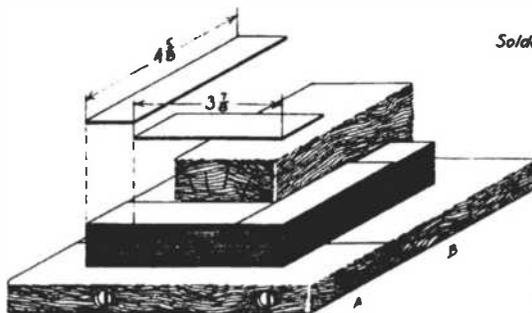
Assembling the Core How the two legs and one yoke are built up round a wooden form
